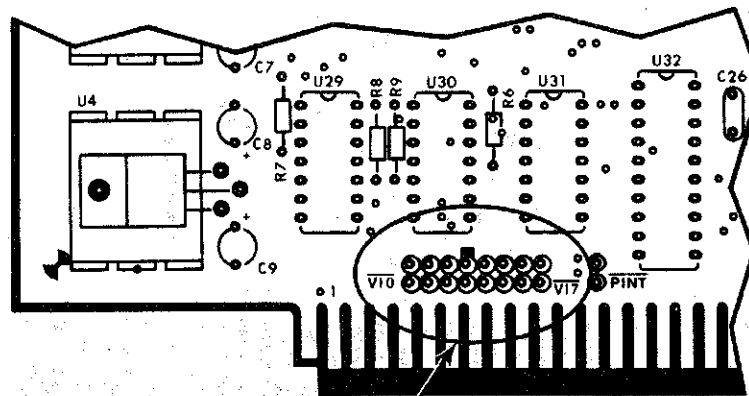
AM-300 I/O Port Address Jumper Setting
